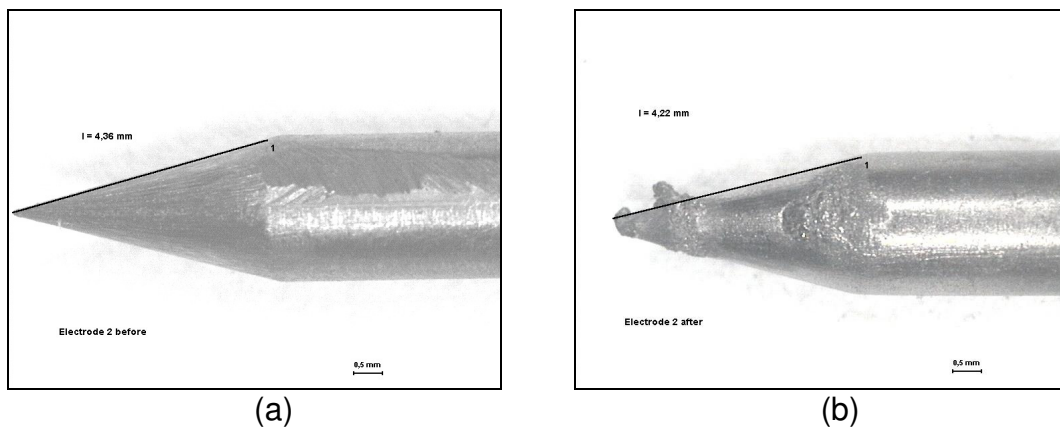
Electrode 2 used for experiment number 3: (a) before welding; (b) after welding.
